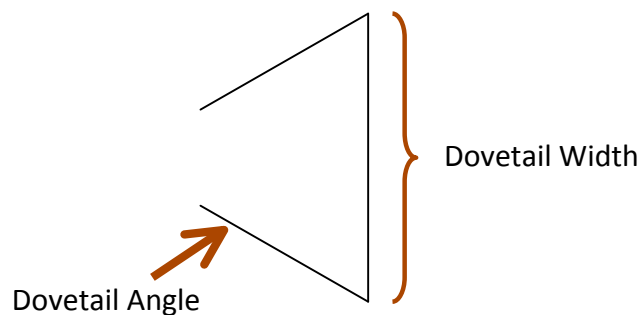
Drawing of Drawer constructional elements and measurements.
